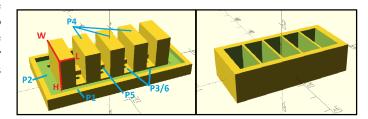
Example of 3D CAD of a mould produced the automatic design tool: Part A (left) and Part B (right).
